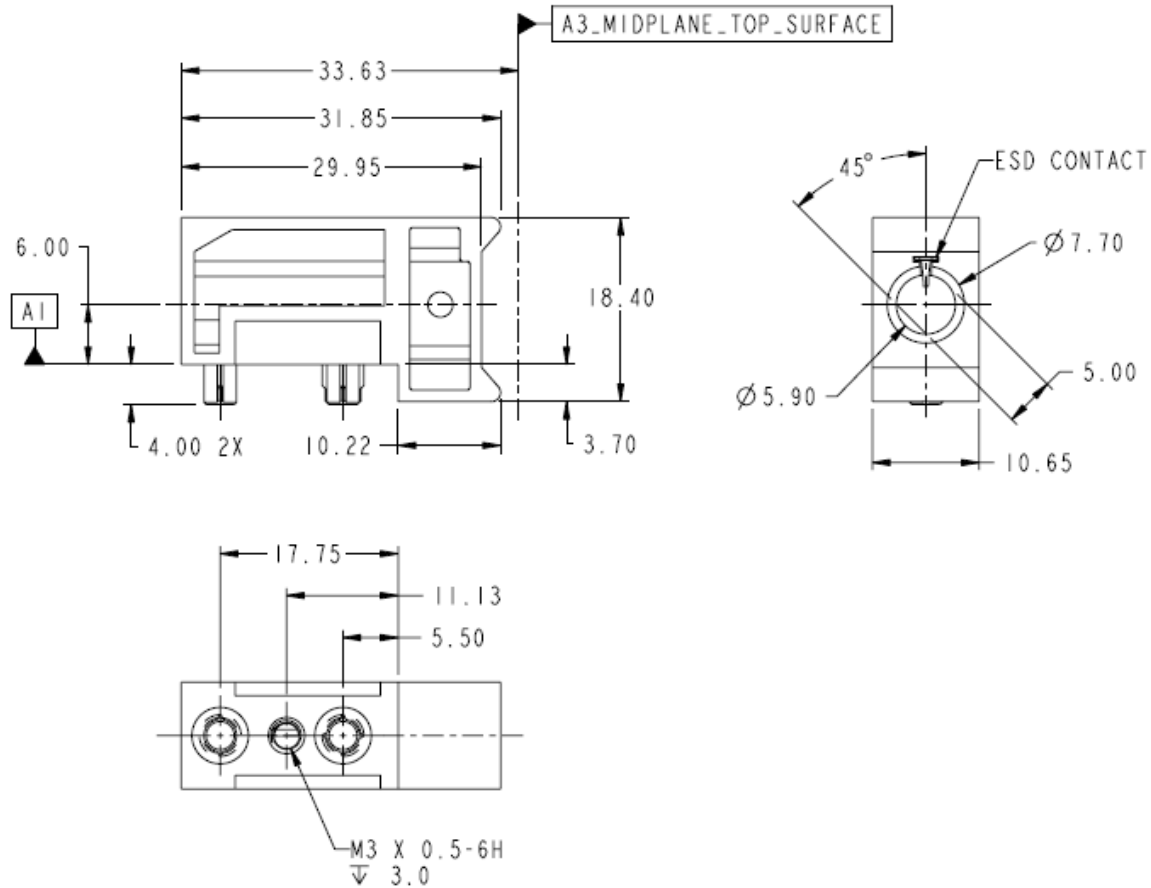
SBBMI Canister Guide Pin Receptacle Dimensions⁵
